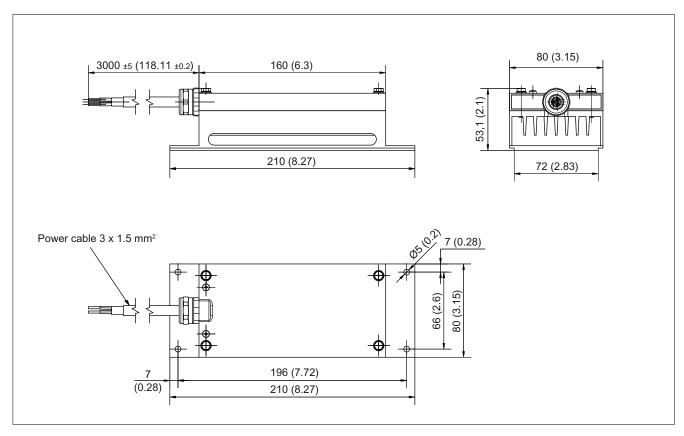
300 W damping resistor for HFD line reactors, all dimensions in mm and (inches)
